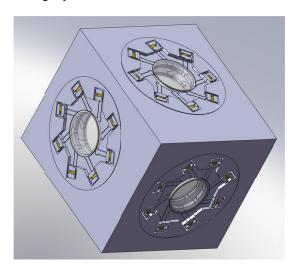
A motor with three axis of rotation that are orthogonal. A two axis DOF motor could be used in a manipulator joint.
